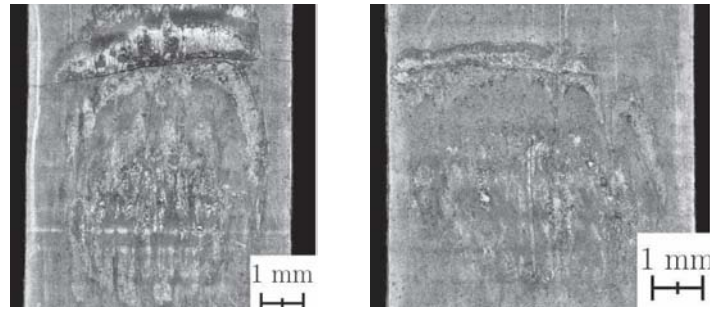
Detail of worn contact surfaces of the specimen after fretting test no. 1
